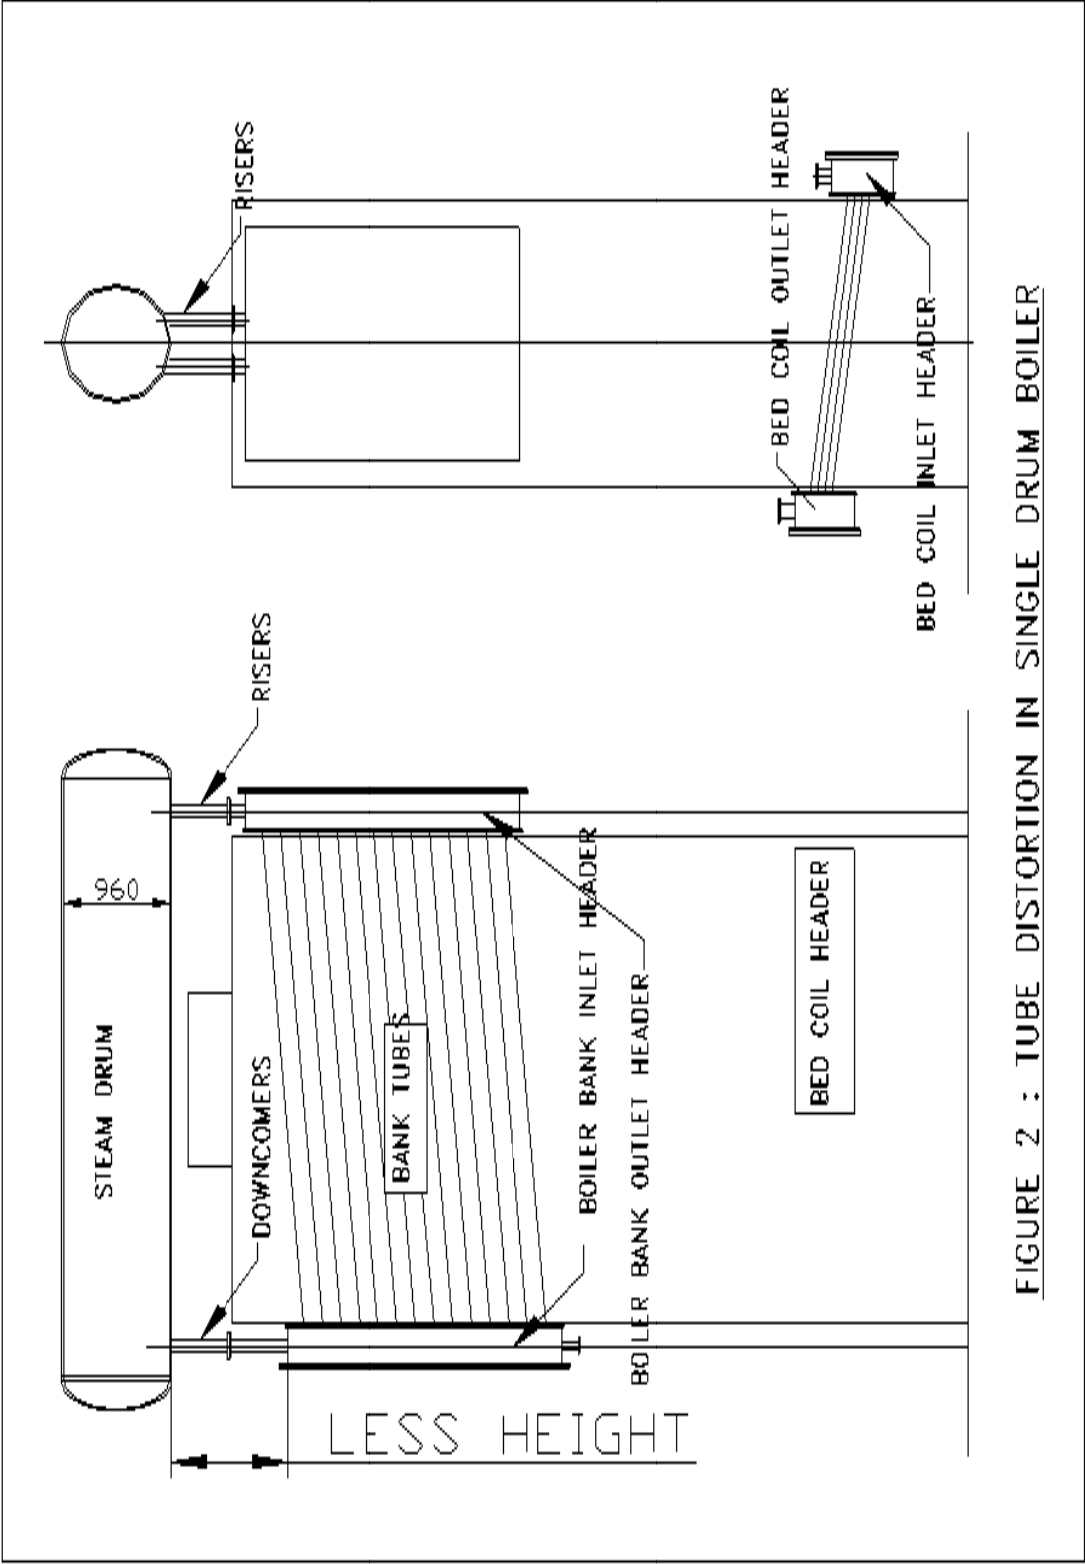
TUBE DISTORTION IN SINGLE DRUM BOILER
